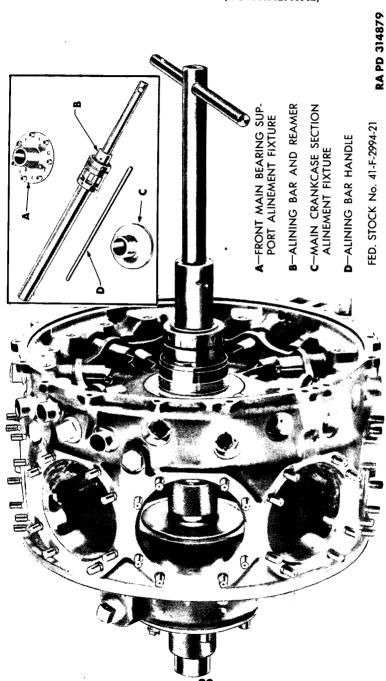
Fixtures and Reamer Installed for Reaming Rear Main Bearing
